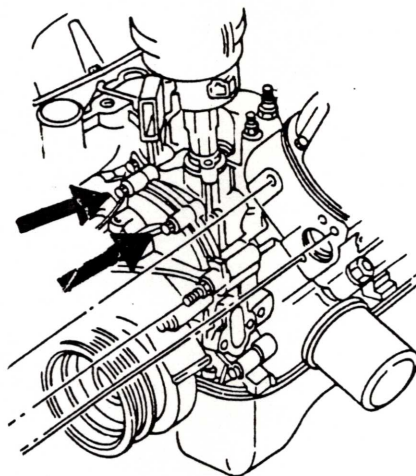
FRONT SUPPORT BRACKET TO WATER PUMP MOUNT.
